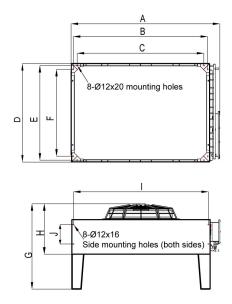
Schematic diagram of the outline dimensions of a single fan outdoor unit
